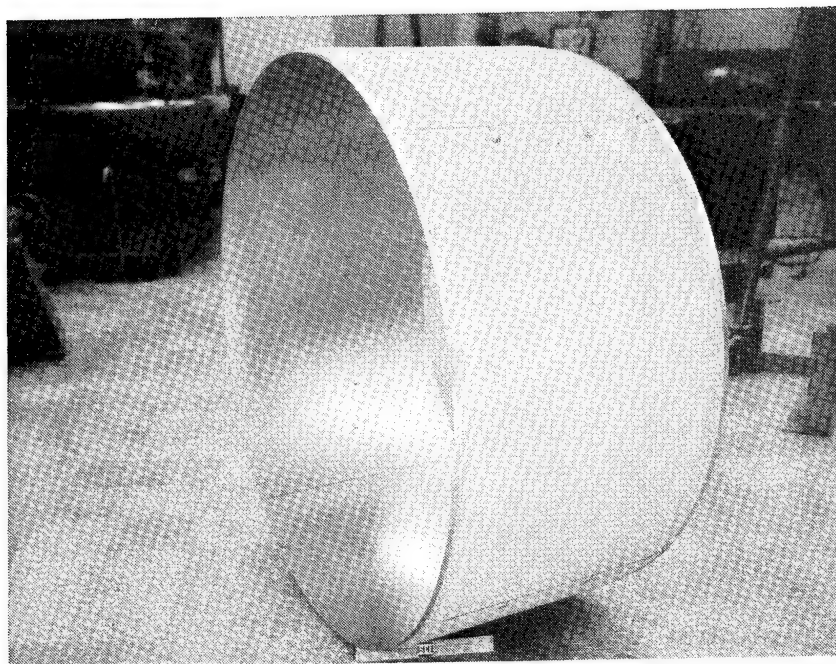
Prototype Shell of 2219 Aluminum Assembled to Mandrel Support Fixture
